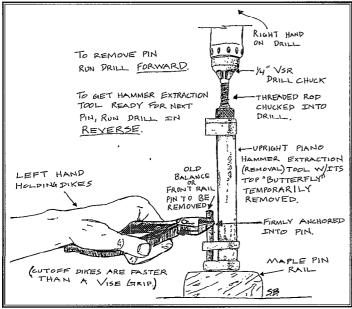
Setup for removing old key pins with modified hammer head extractor, electric drill, and dikes.
